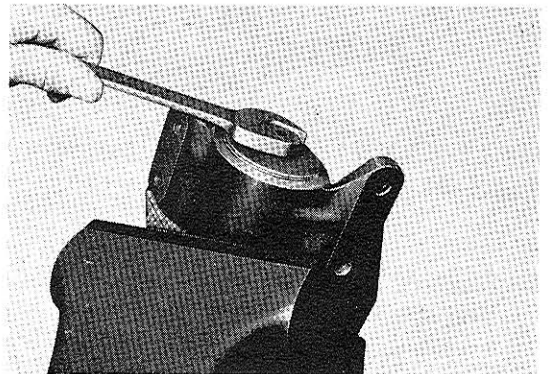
Removing Center V5134 Arm Shaft Nut
